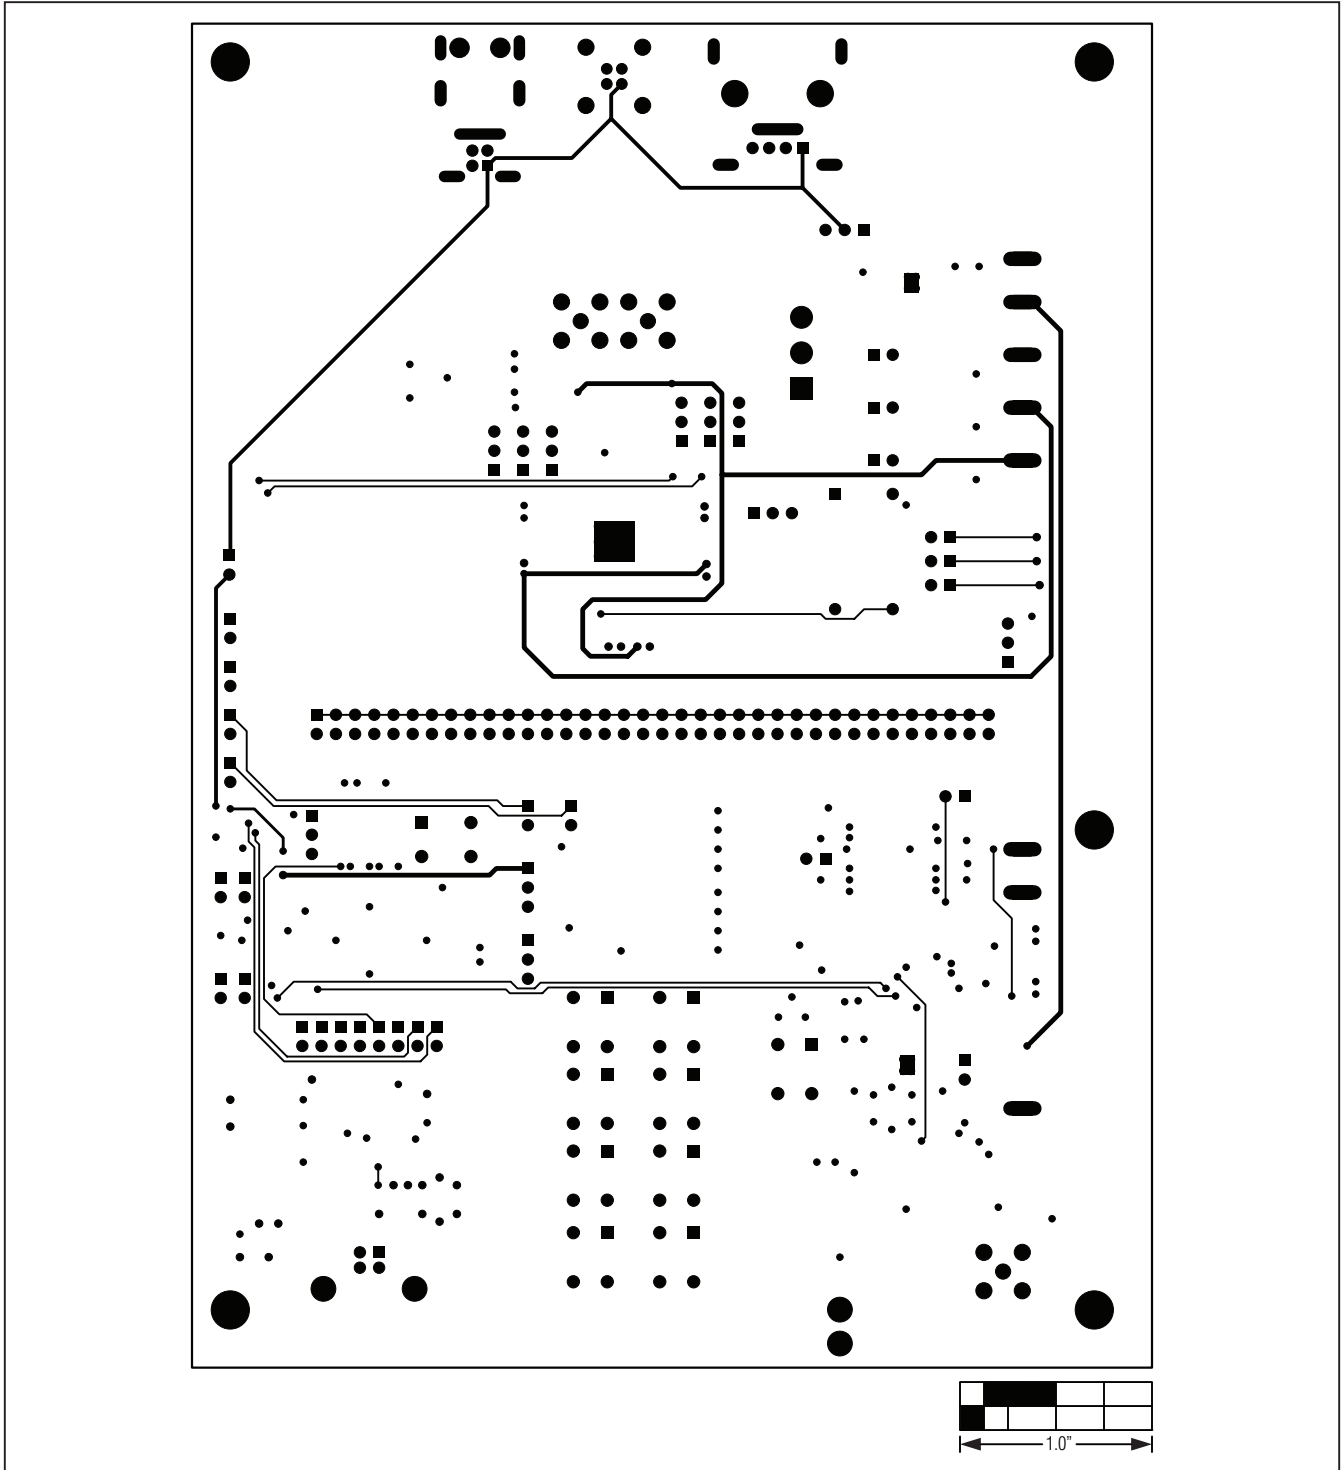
MAX9259 EV Kit PCB Layout—Solder Side
